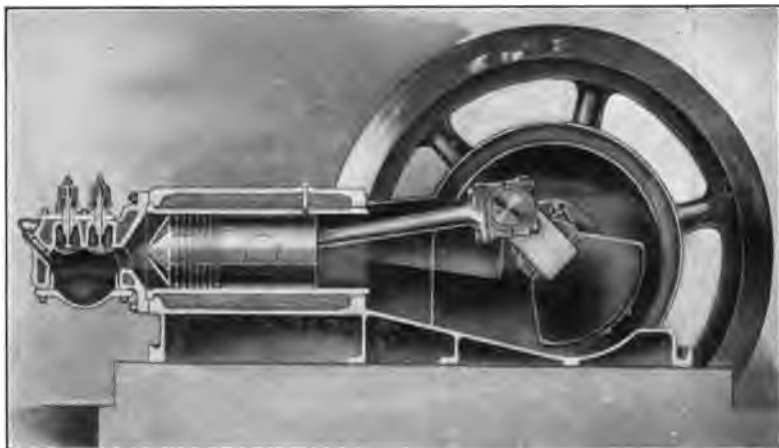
Cylinder with removable liners De La Vergne D.H. low compression oil engine.
